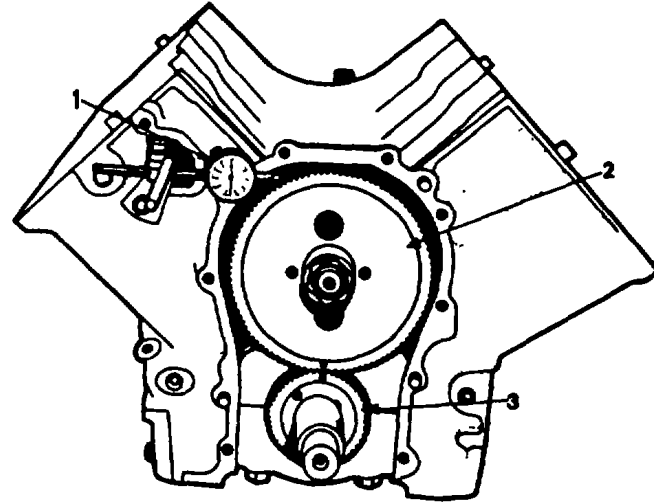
Checking Camshaft and Crankshaft Gear Backlash
